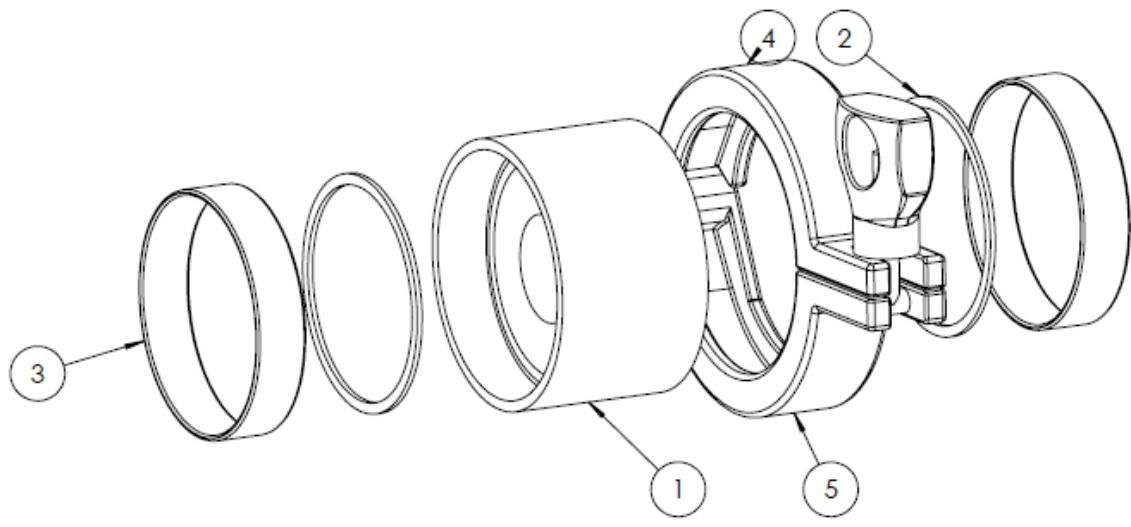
Example of a single baffle intersection point. 1 Baffled passage, 2 Tube baffle nitrile O-ring, 3 Neoprene tube support sleeve, 4,5 Compression clamp.
